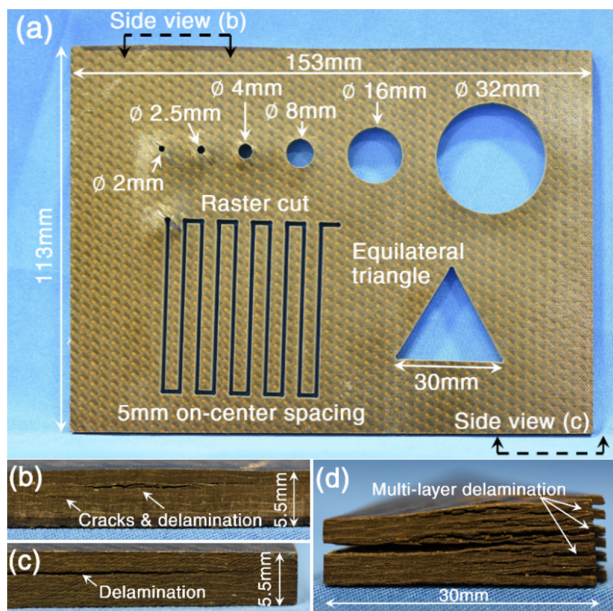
(a) Top view of various shapes cut in a CFRP sheet with AWJ, (b) side view of top-edge, (c) side view of bottom-edge, and (d) side view of cut out triangle showing delamination features.
